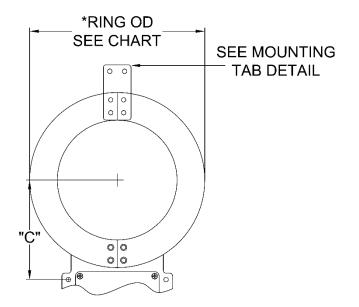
Ring Diameter and Interface Location for 20 to 52 mm [0.75 to 6.00 in] Shafts
